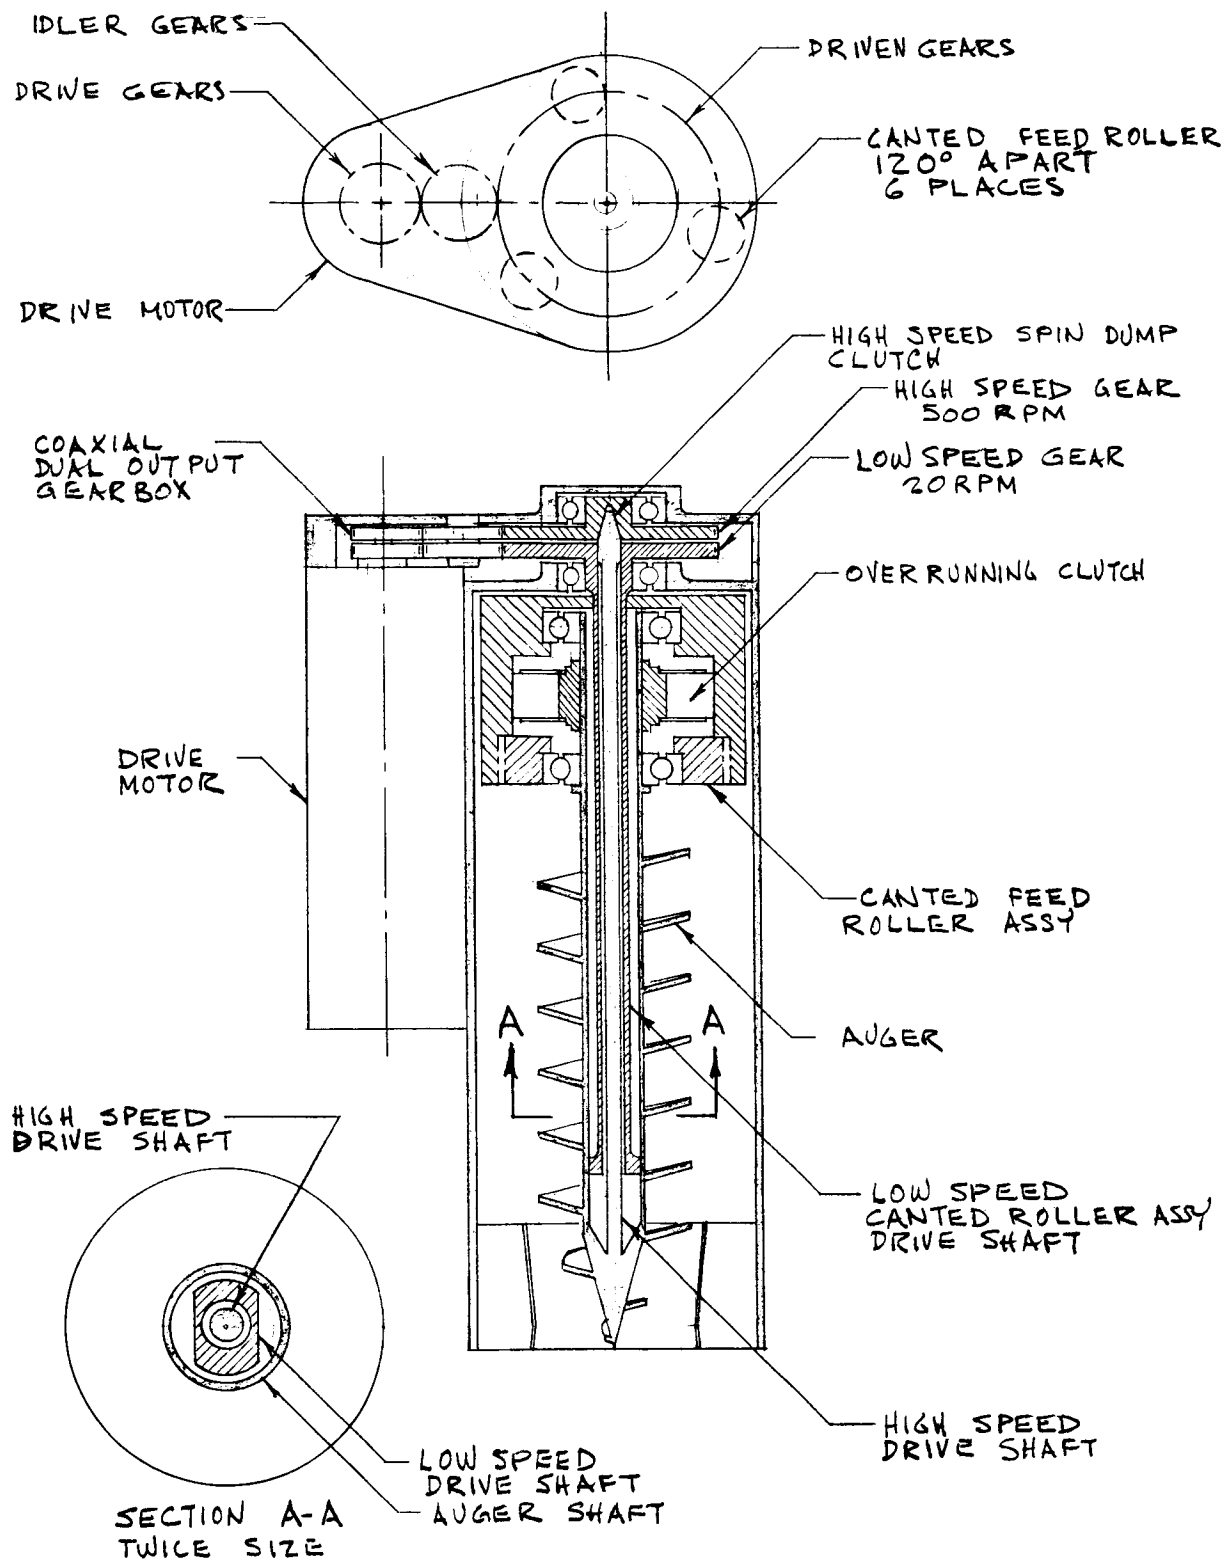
SOIL AUGER - CANTED FEED ROLL DRIVE
